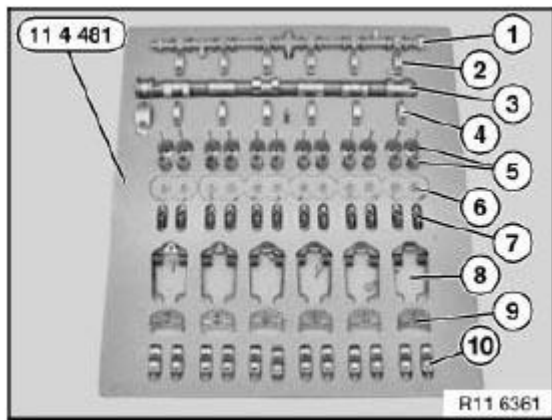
Identifying Intermediate Lever Components On Special Tool
